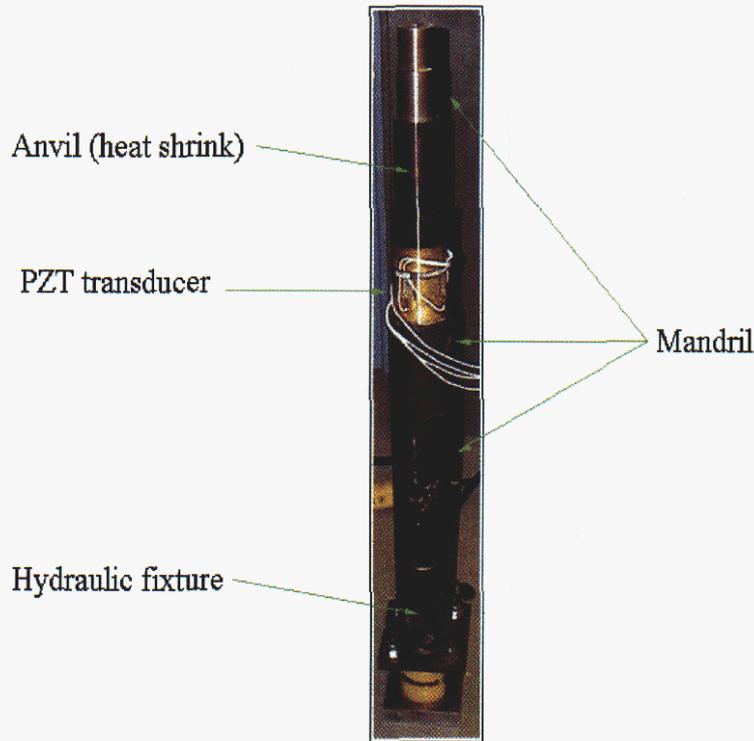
Test fixture for heat shrink assembly of the anvil to the mandril.
